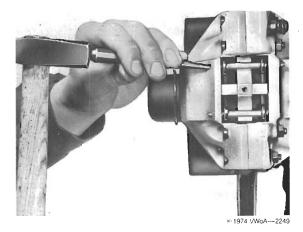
Driving out pad retaining pin. The spreader spring is the cross-shaped piece behind the pins
